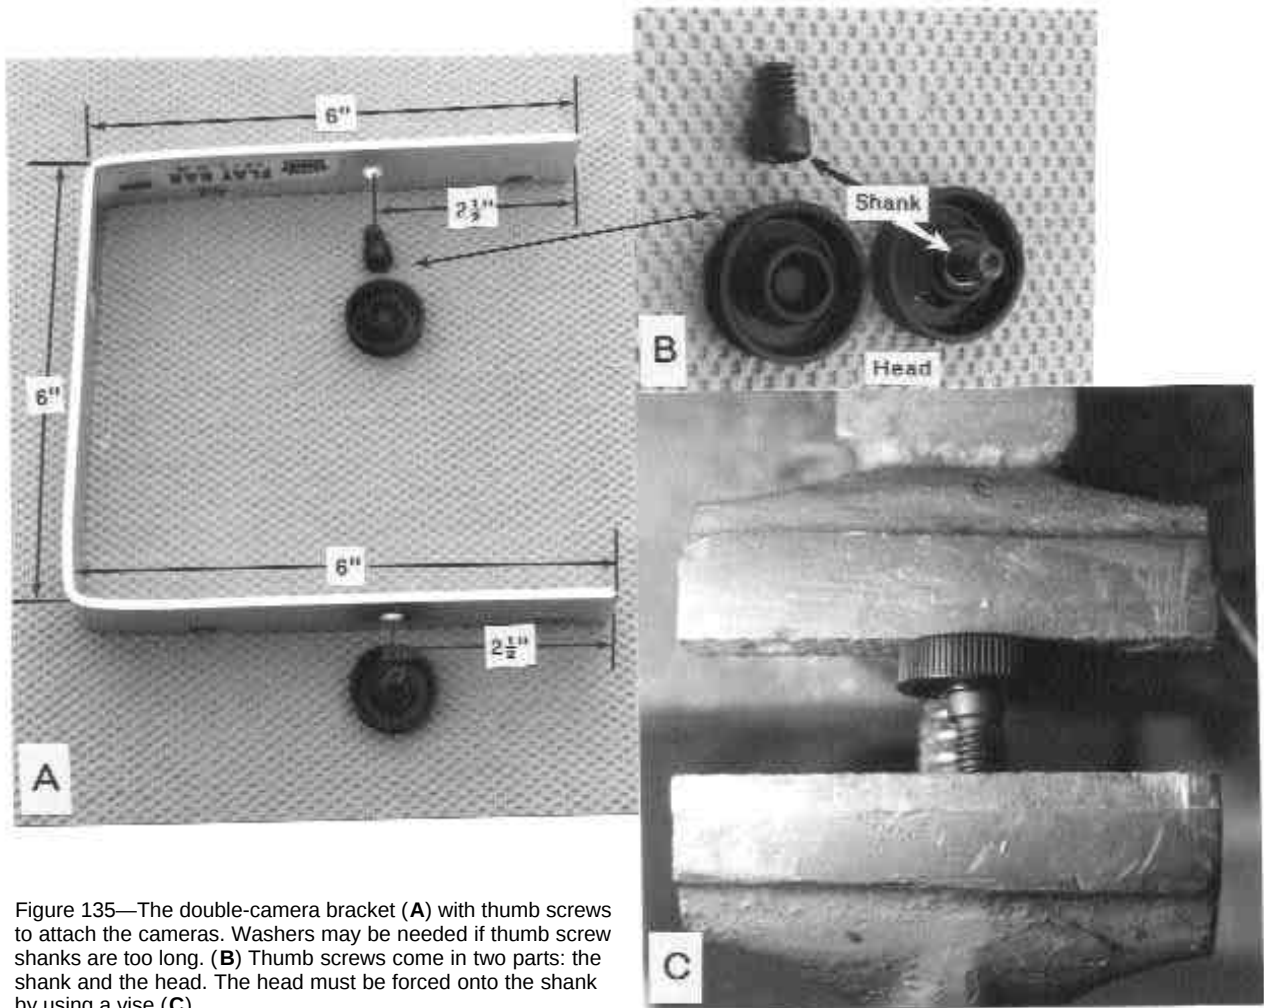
The double-camera bracket (A) with thumb screws to attach the cameras. Washers may be needed if thumb screw shanks are too long. (B) Thumb screws come in two parts: the shank and the head. The head must be forced onto the shank by using a vise (C).
